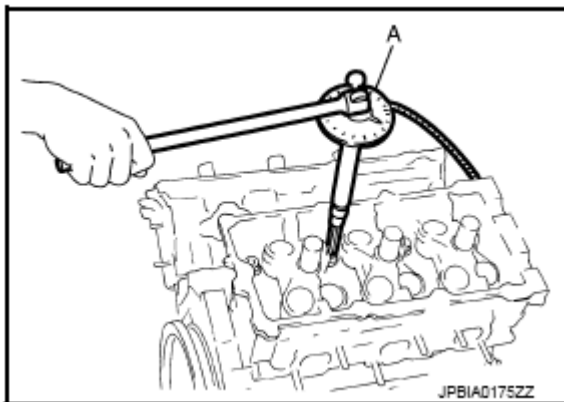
Checking Cylinder Head Bolts Tightening Angle Using Angle Wrench
